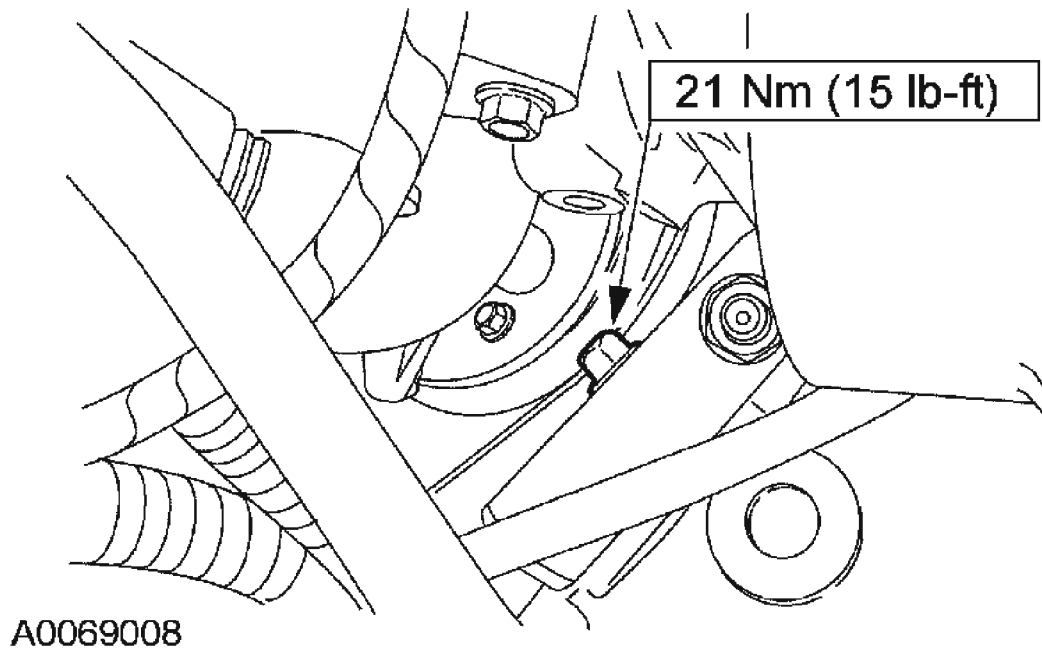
Loosening Compressor Manifold Bolt And Removing A/C Compressor
